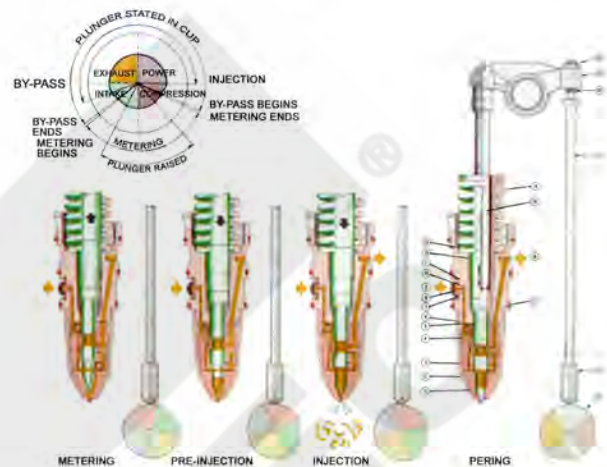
(FWC-28). Fuel injection cycle - PT (Type D)
